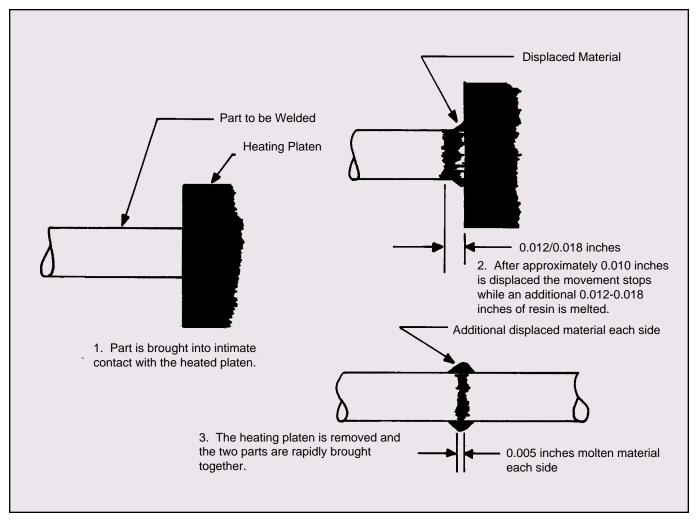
Heating The Plastic Resin for Welding
